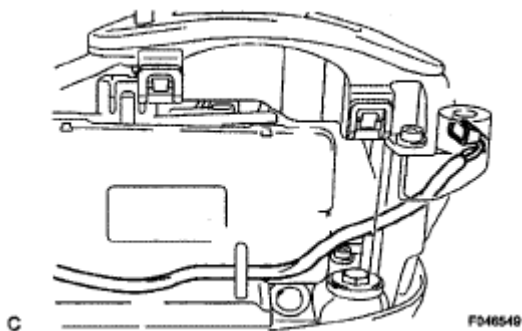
Identifying Indicator Light Bulb And Indicator Light Cap To Indicator Light Wire
